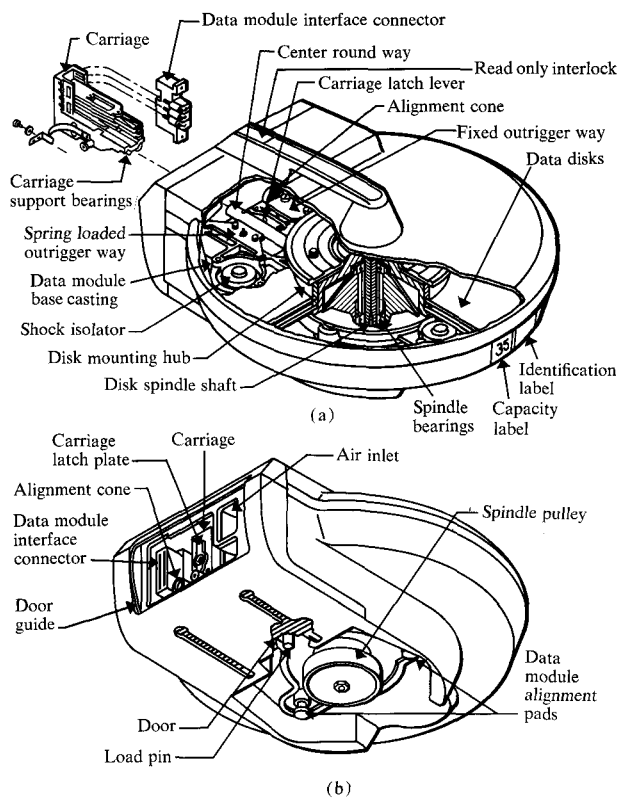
Main design features of IBM 3348 Data Module. (a) Top rear section, exploded and cutaway view; (b) front bottom view, showing pulley, alignment pad, connector, etc.
